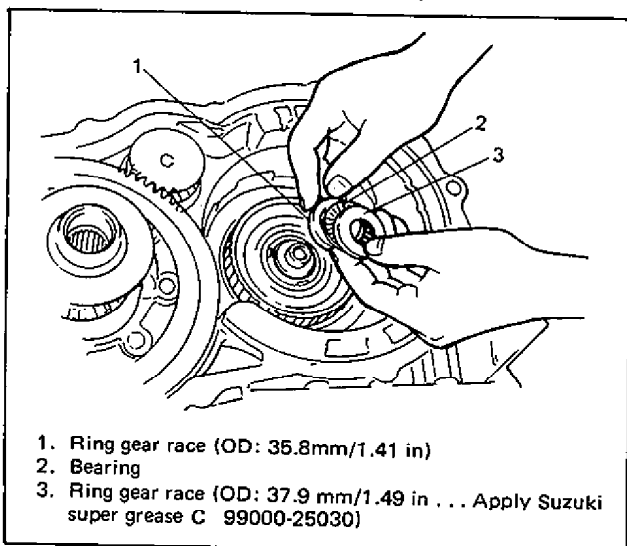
B-211 Assembling Direct Clutch and Input Shaft
